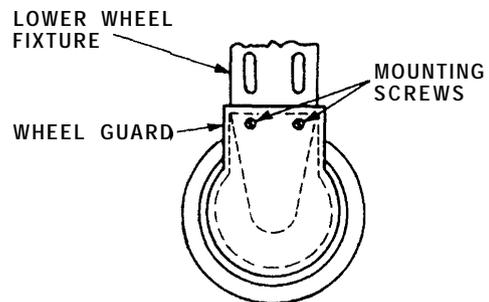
Mounting Wheel Guard to the Lower Wheel Fixture.
